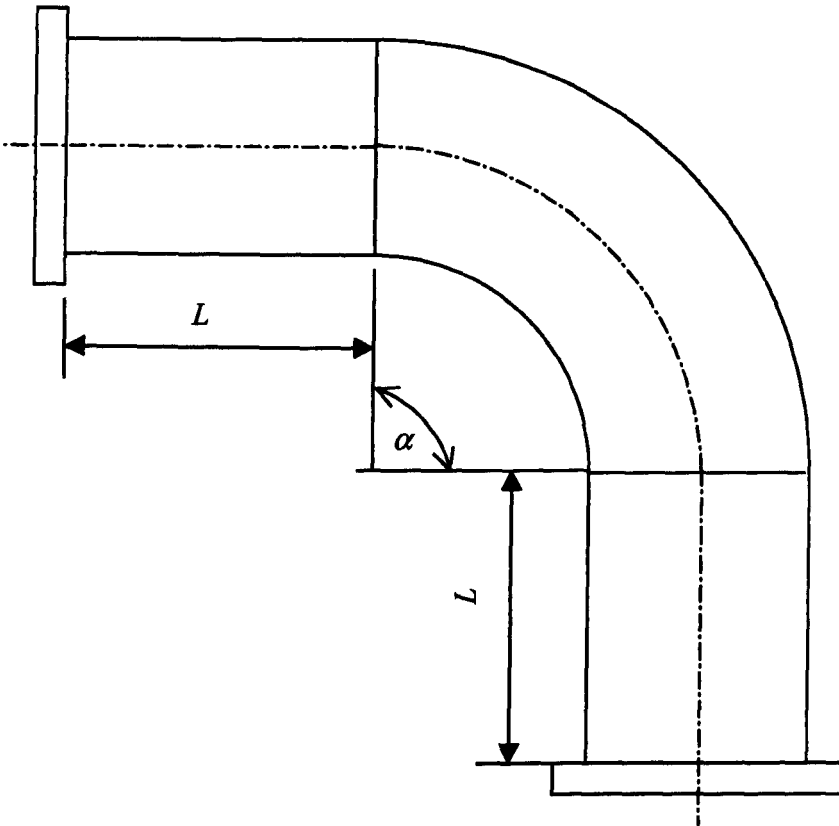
Pipe elbow with end flanged investigated by Whatham and Thomson [66]
